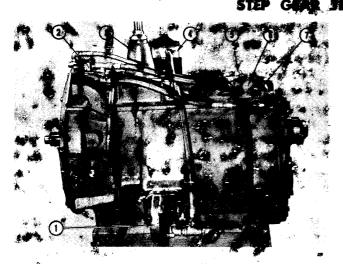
, STEP GEAR TRANSMISSION 1. Oil Pump 3. Shift Lever Housing .6. Plunger Guide Cover 2. Pilot Air Valve 4. Oil Filter 7. Surge Chamber 5. Trigger Valve
